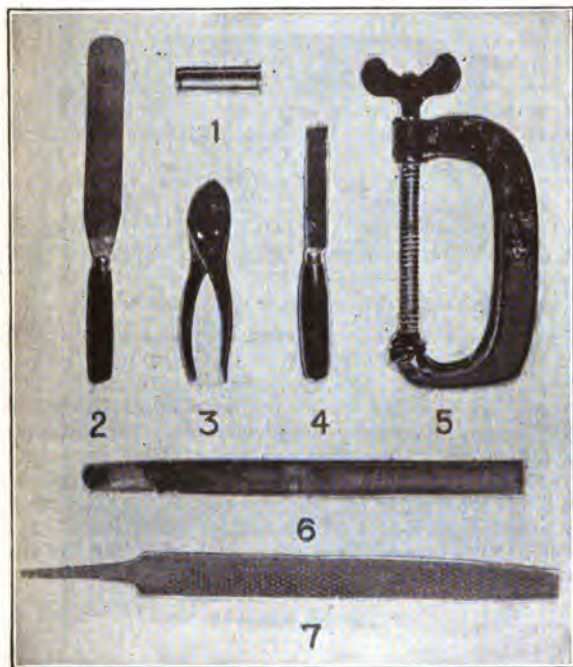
Curing tools. 1—air gauge. 2—soapstone knife. 3—pliers. 4—trimming knife. 5—C clamp. 6—prodding tool. 7—wood rasp.
